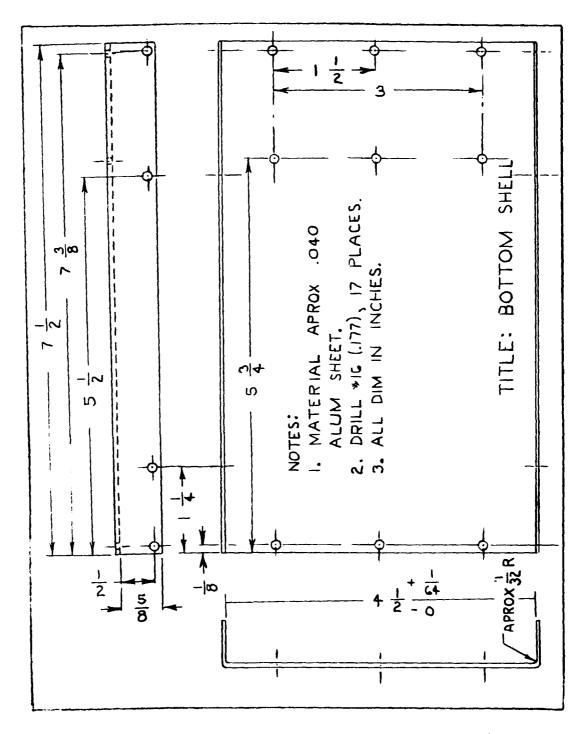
Flight Recorder Mechanical Drawings, Sheet 6 of 6
